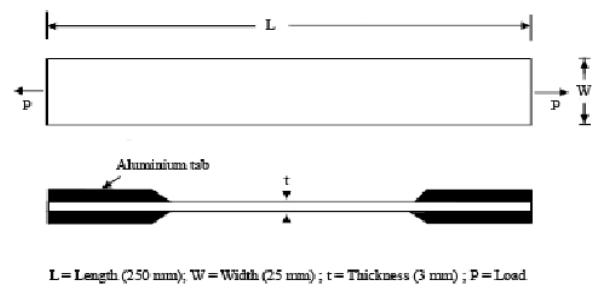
Specimen dimension for tensile test as per ASTM D 3039 standards
